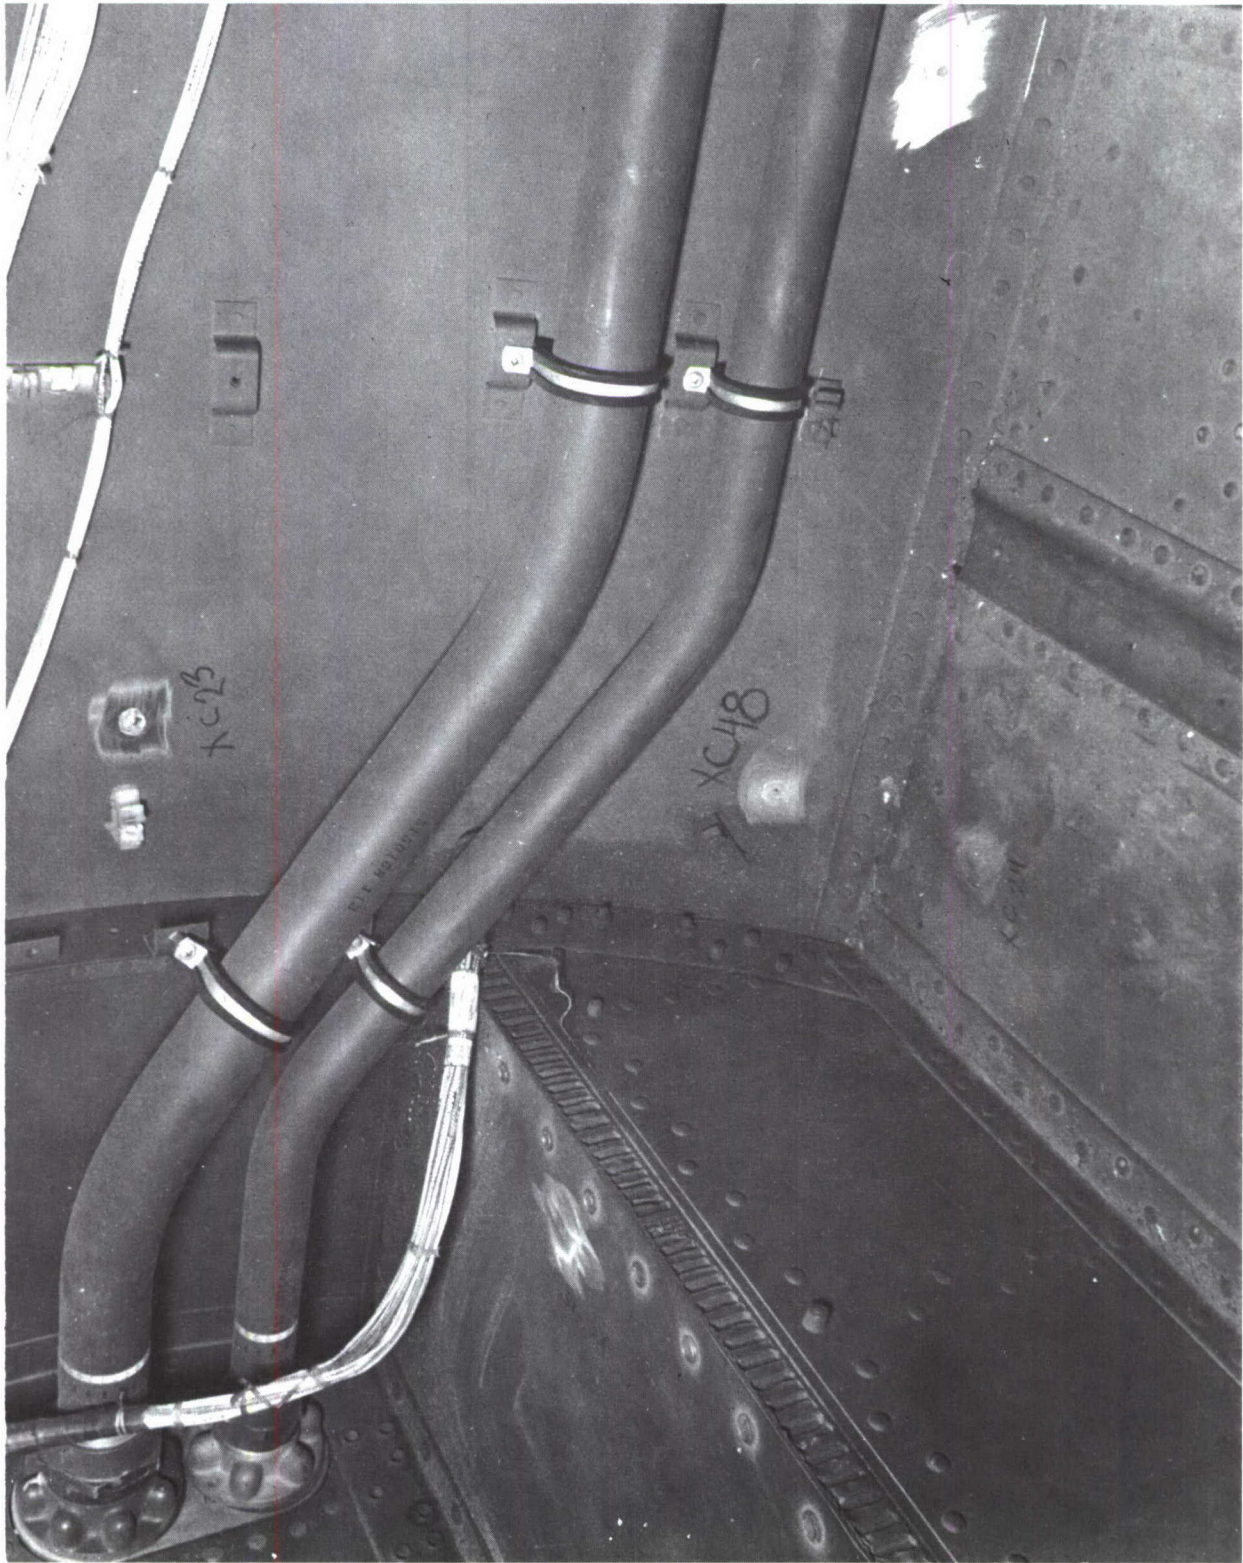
INSIDE VIEW OF R.H. SIDE OF VEHICLE EQUIPMENT BAY, F.S. 536.0-600.0
